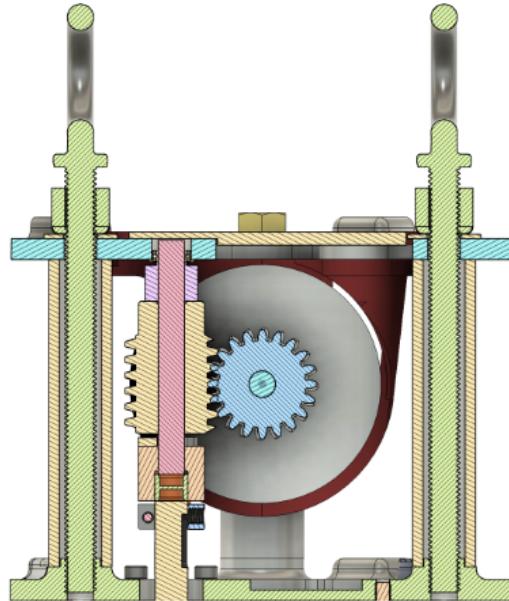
Cross section perpendicular to the shaft of the BLiMS assembly upper section. In tan is the worm. In blue is the worm gear. In green are the eyebolts. In pink is the vertical shaft.
